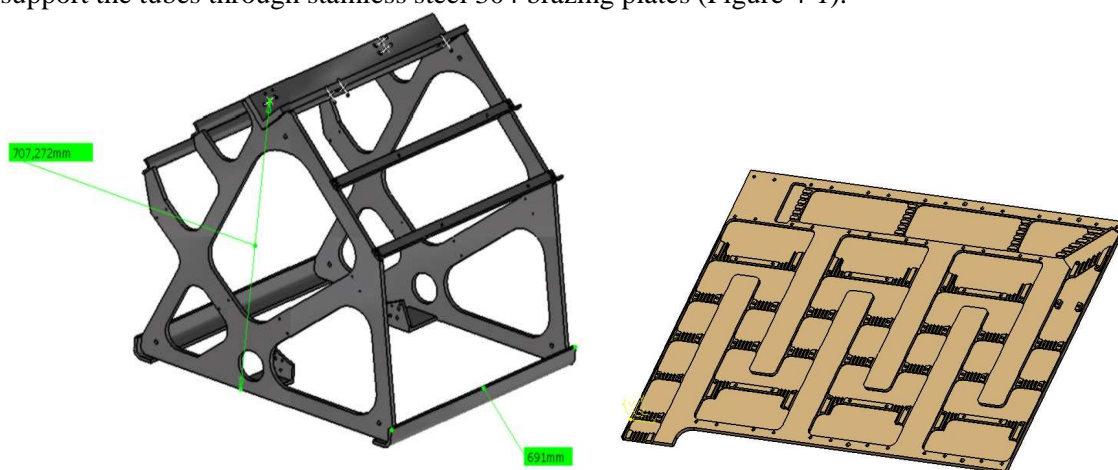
Transport and brazing jig (left) and brazing bottom plate.
